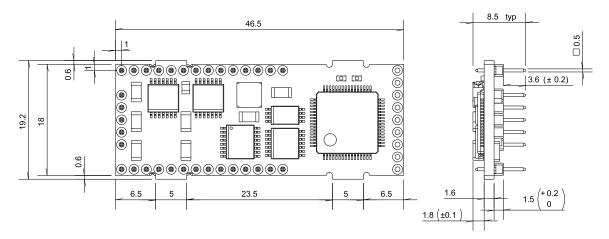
iPOS2401 MX-CAN drive dimensions
